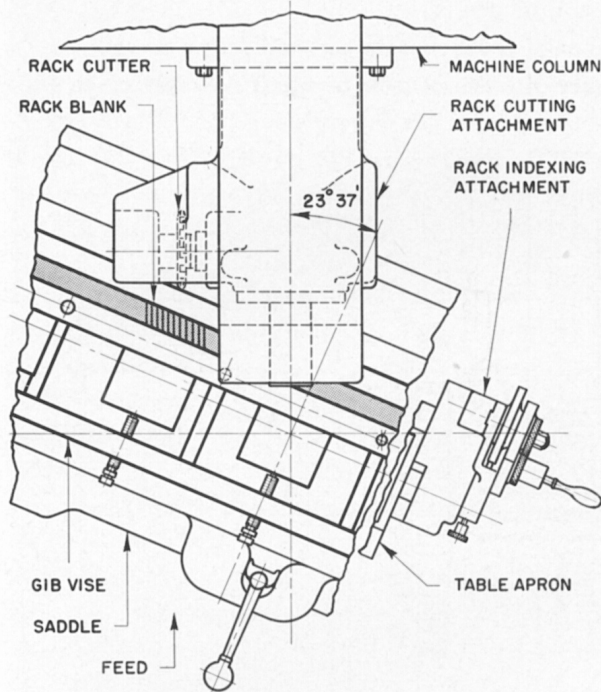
Plan view of set-up for milling rack teeth at an angle of $23^\circ 37'$ by using the cross feed of the machine. The milling cutter is mounted on a rack-cutting attachment which places the cutter parallel to the motion of the saddle.
